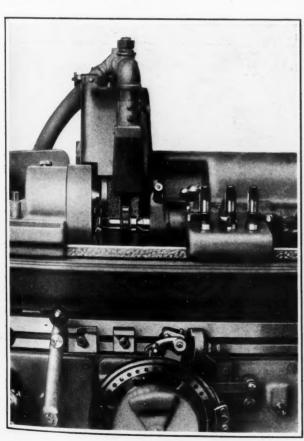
Grinding Shock Absorber Shafts with Duplex Wheels on a Center Type Machine
